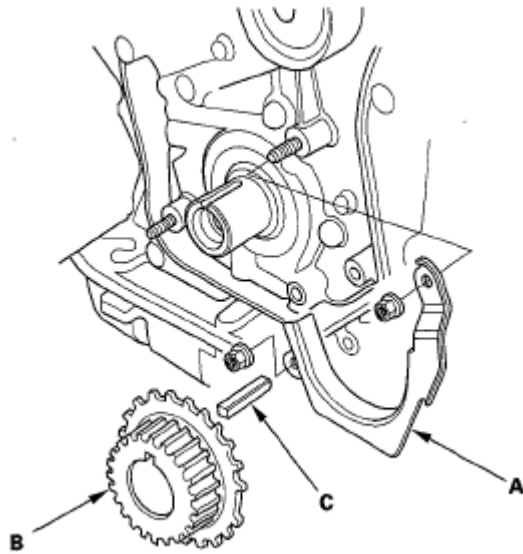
Identifying Timing Belt Stopper And Timing Belt Drive Pulley
